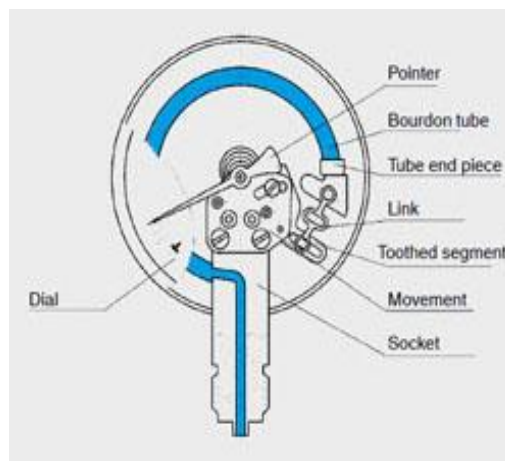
Cross section diagram of Bourdon tube pressure gauge
